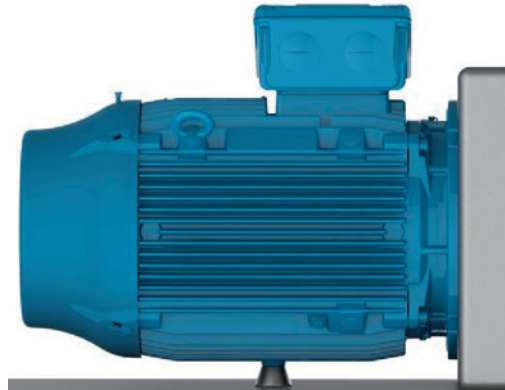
Mounting method of flange mounted motors with frame base support
